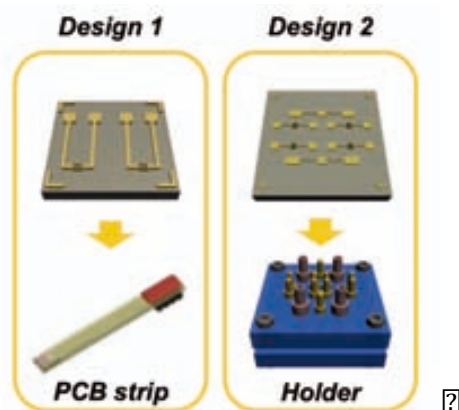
Two devices designs developed in this thesis: Design 1 to be used with PCB type packaging and Design 2 with Holder type packaging.
